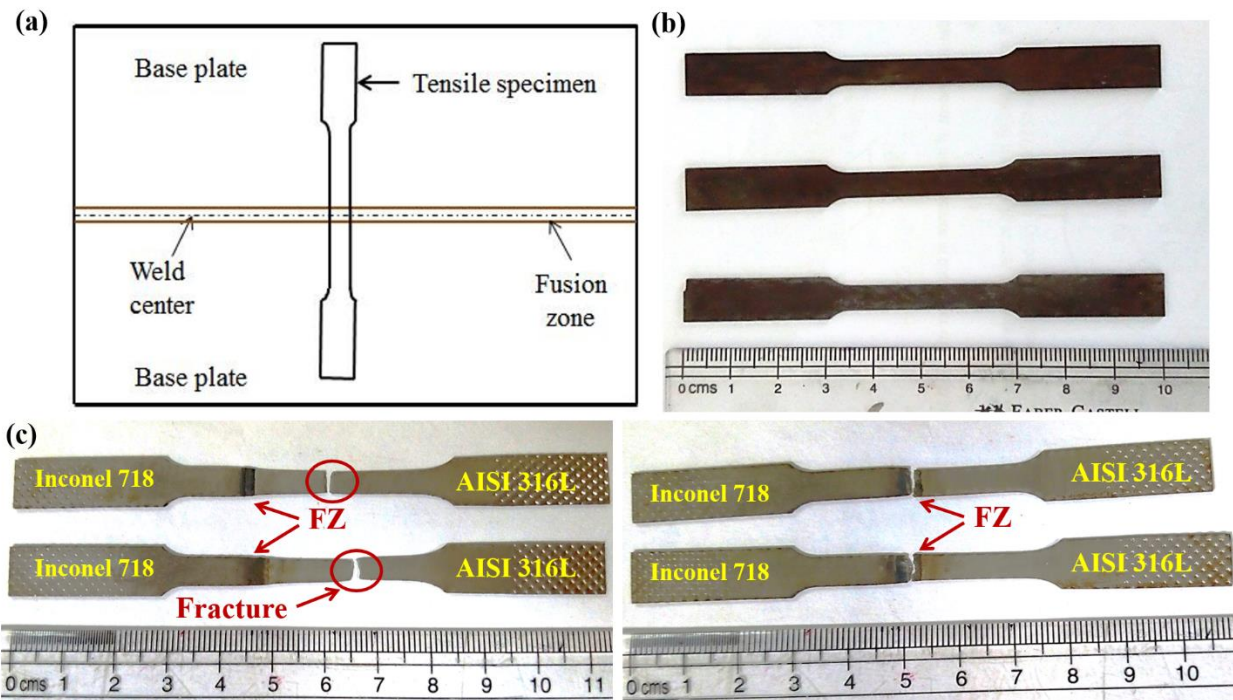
(a) Transverse tensile specimen location in the welded specimen (b) Sub size tensile specimens before testing and (c) Showing location of failure in base material and fusion zone after testing
